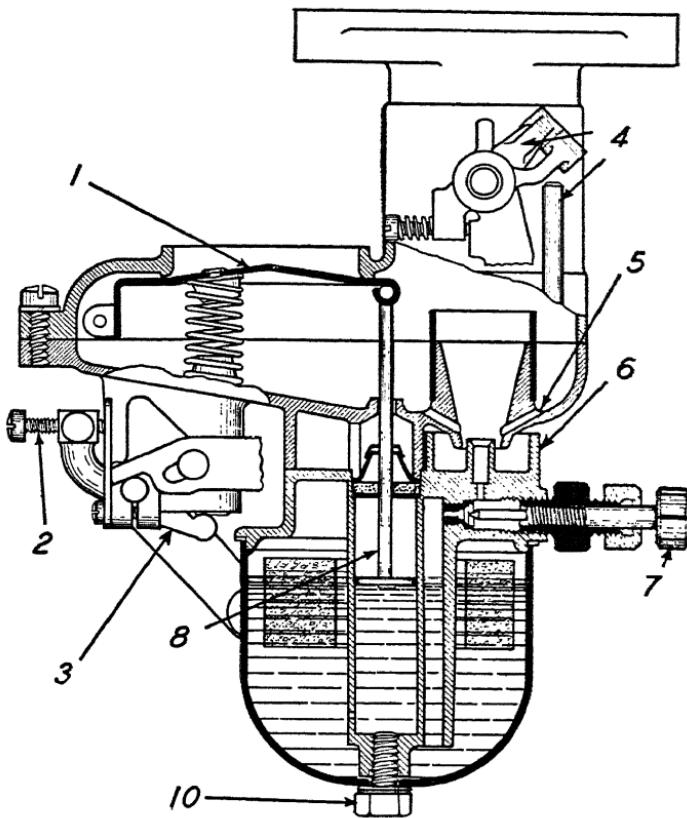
Service Drawing of Johnson Model "H" Carburetor
